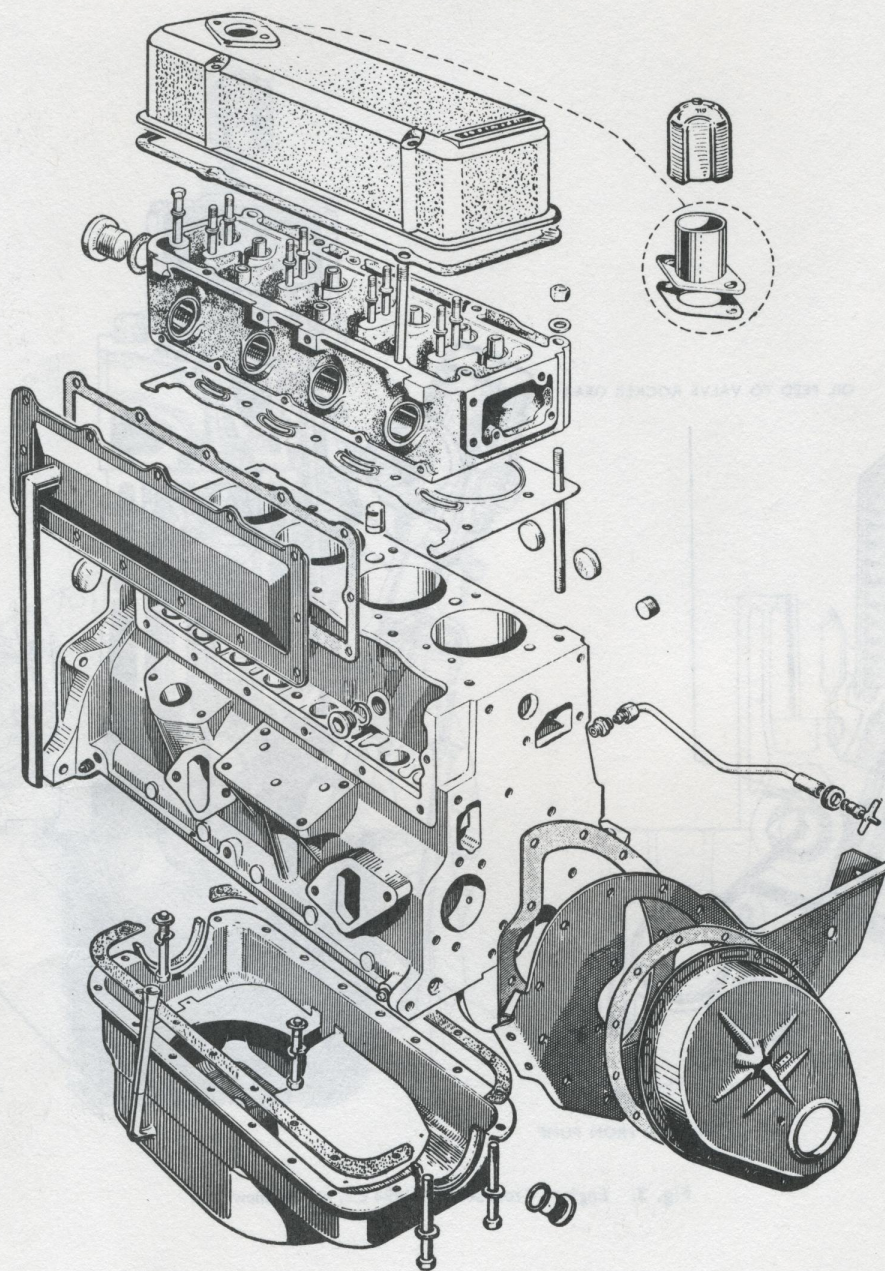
Cylinder block and associated parts (1494 c.c. engine shown)
